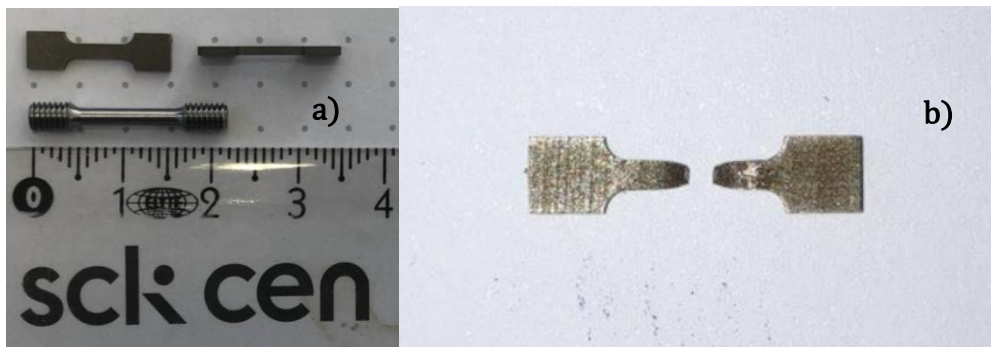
a) Flat tensile (upper) and cylindrical (lower) specimens; b) A fractured flat tensile specimen with the “neck”.
